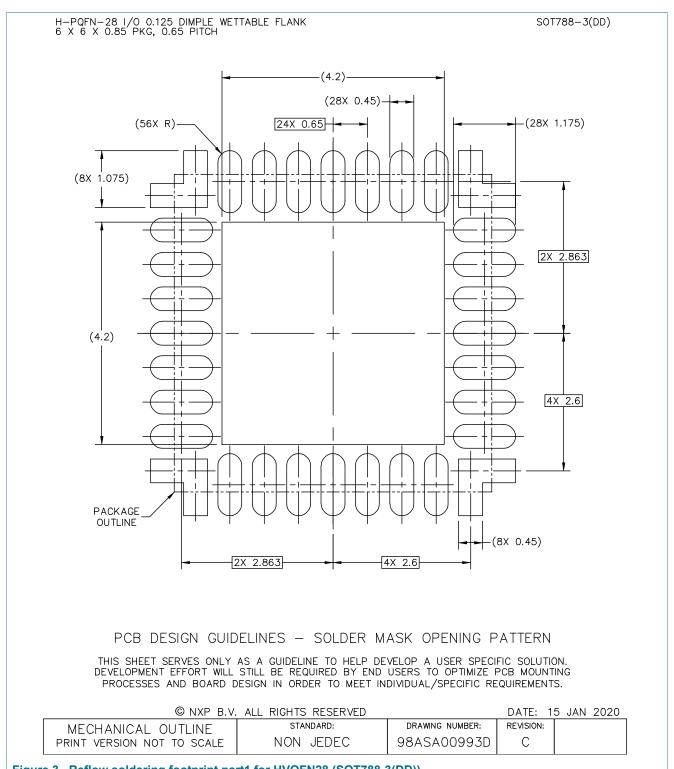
Reflow soldering footprint part1 for HVQFN28 (SOT788-3(DD))
